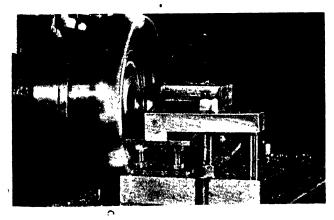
A WICKMAN FACE MILL, 10 IN. DIAMETER, 5° NEGA-TIVE HELIX AND RADIAL RAKES, MILL-ING AN AIRCRAFT ROOT-END-FITTING, 65 TONS TENSILE STEEL FORGING
